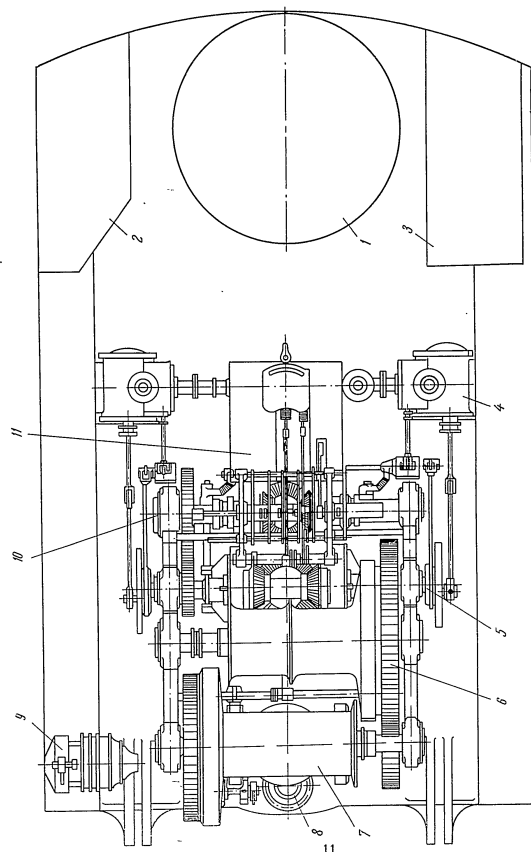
Plan of PK-25 Crane Turntable: 1 - steam boiler; 2 - water tank; 3 - reversing gear; 4 - main winch; 5 - crankshaft; 6 - slewing mechanism; 7 - grab bucket; 8 - boom-luffing winch; 9 - generator; 10 - control panel; 11 - control panel.
